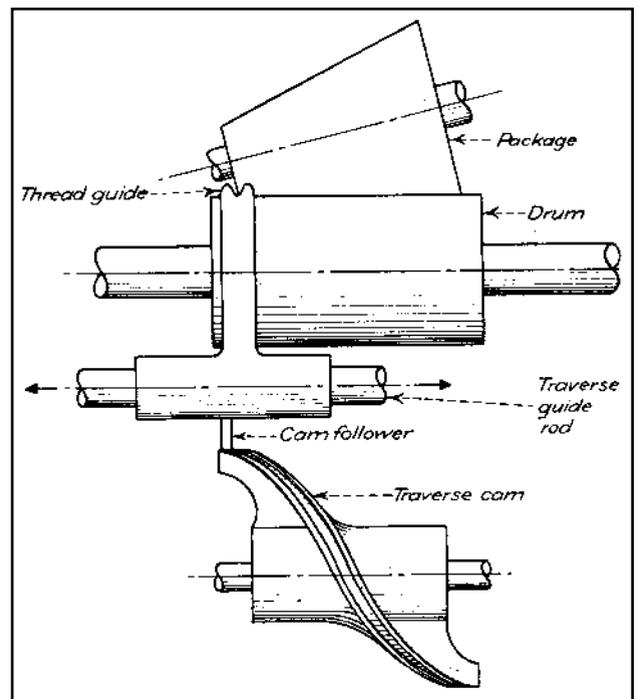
A drum drives the package by friction. A pointed cam shoe, which pivots in the bottom side of the thread guide assembly, rides in cam grooves and produces a reciprocating motion of the thread guide assembly on the traverse bar. Plastic cams have proved to be satisfactory even with fast traverse speeds. Interchangeable cams permit a wide variety of winding methods.
